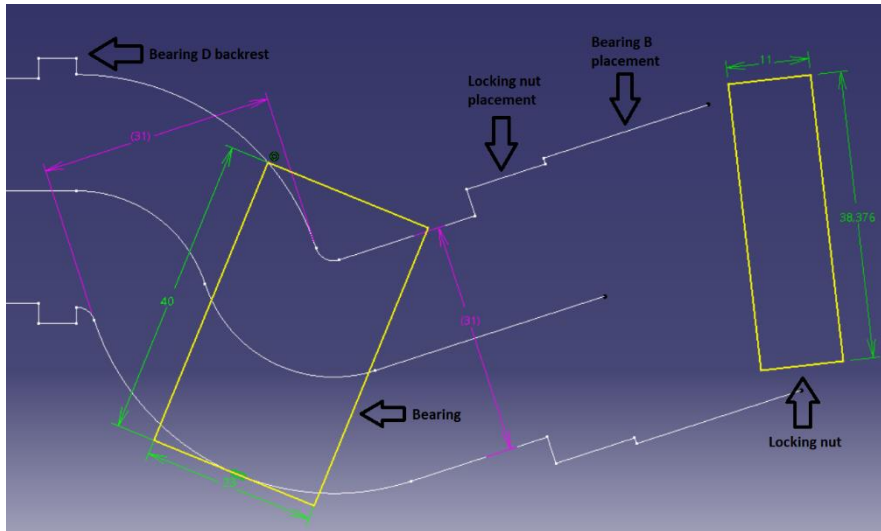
Bearing passage point that defines the maximum crankshaft corner diameter
